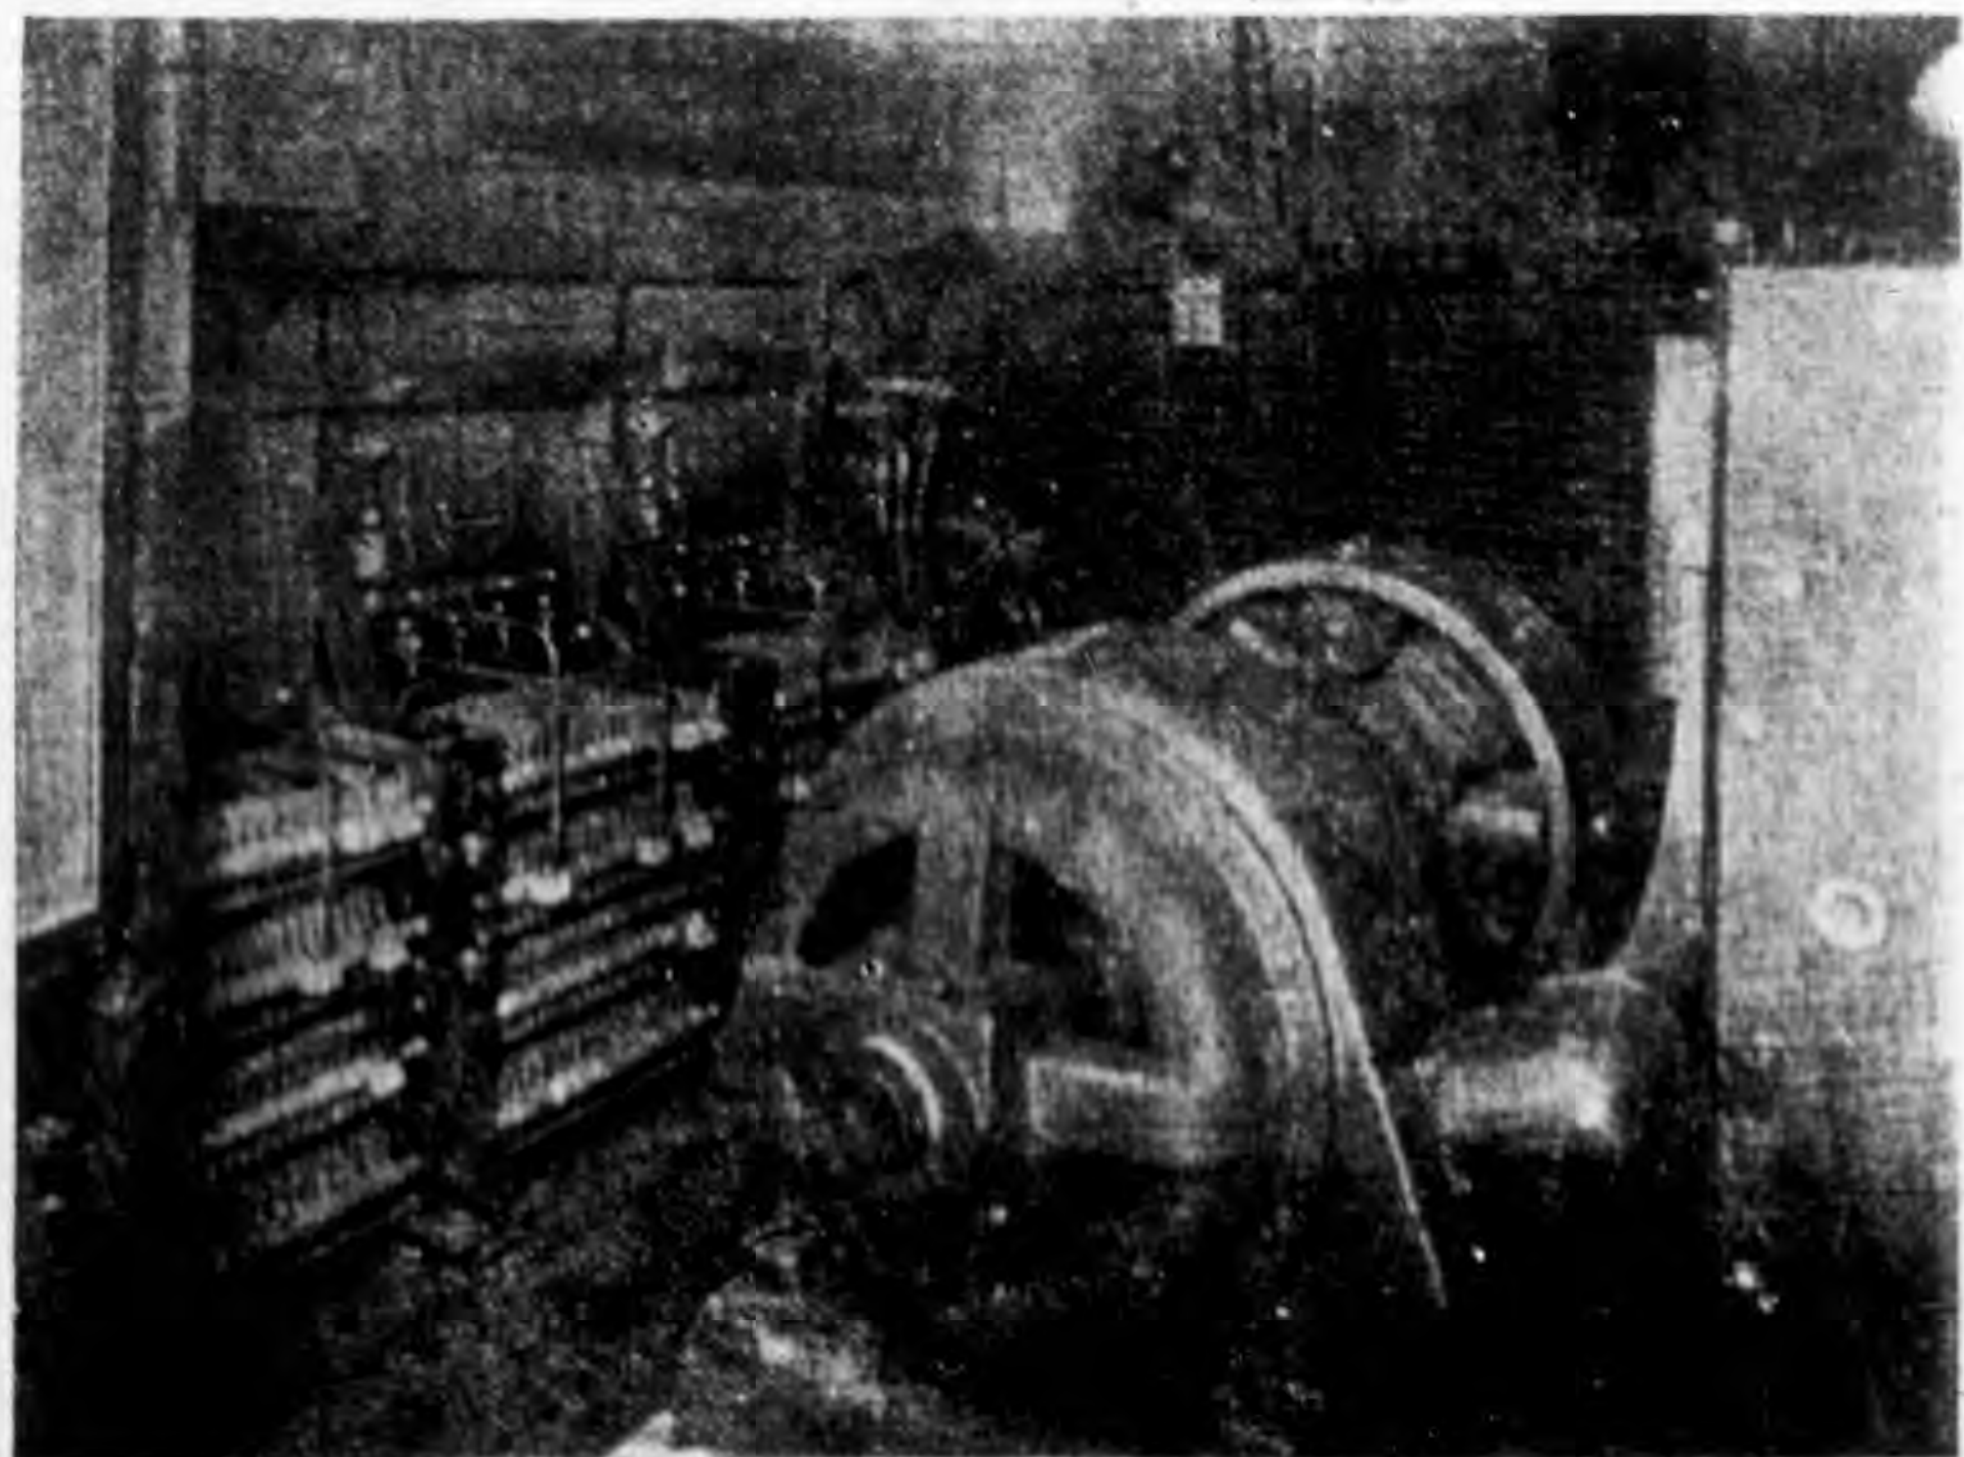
Welding Motor-generator Set, Its Starting Compensator, and the Seat of the D-c. Switchboard
